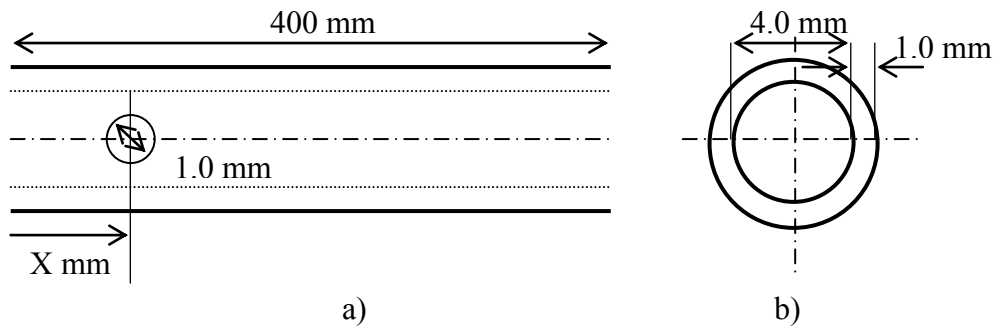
Hole location test sample a) longitudinal cross section b) end view
